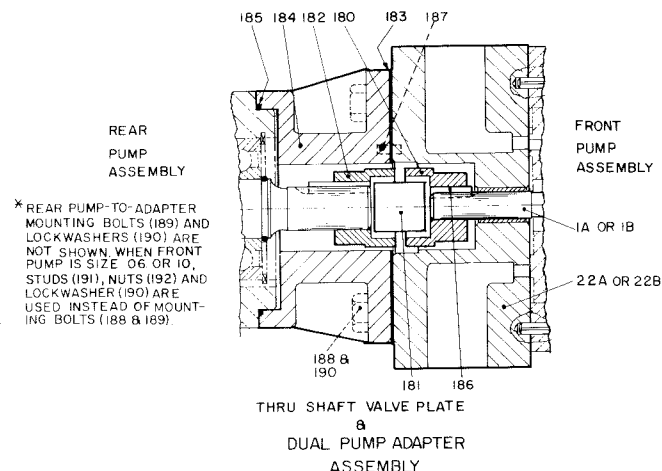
Parts Drawing, Dual Pump Adapter and Coupling Kit. (511783)
